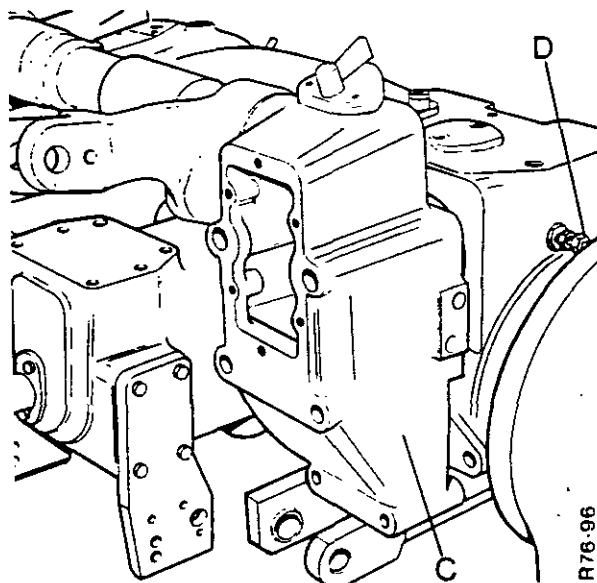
CLAMP BOLT FOR THE LUBRICATION PIPE
